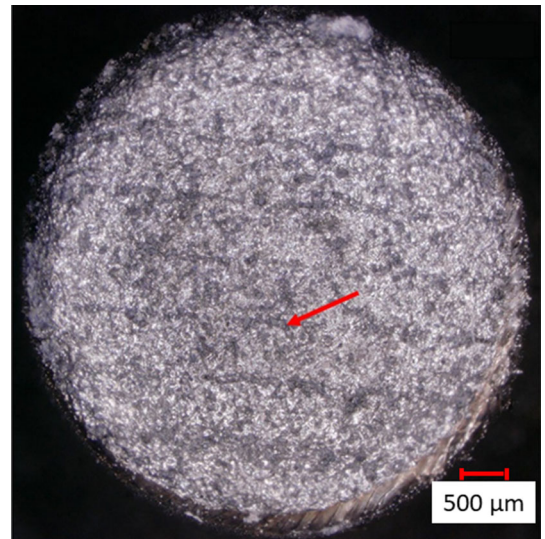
Fracture surface of a steel–ceramic bi-layer sample. The sample was tensile tested and the surface shown is from the steel part of the sample. Remaining ceramic on the fracture surface shows up in the form of gray lines, one being marked by the red arrow (Color figure online).
